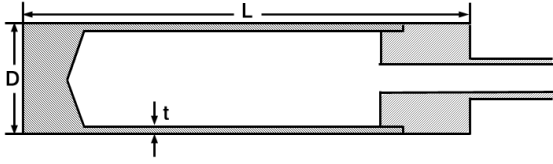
Test samples were machined from solid Alloy 617 in two parts and welded at the butted joint.
